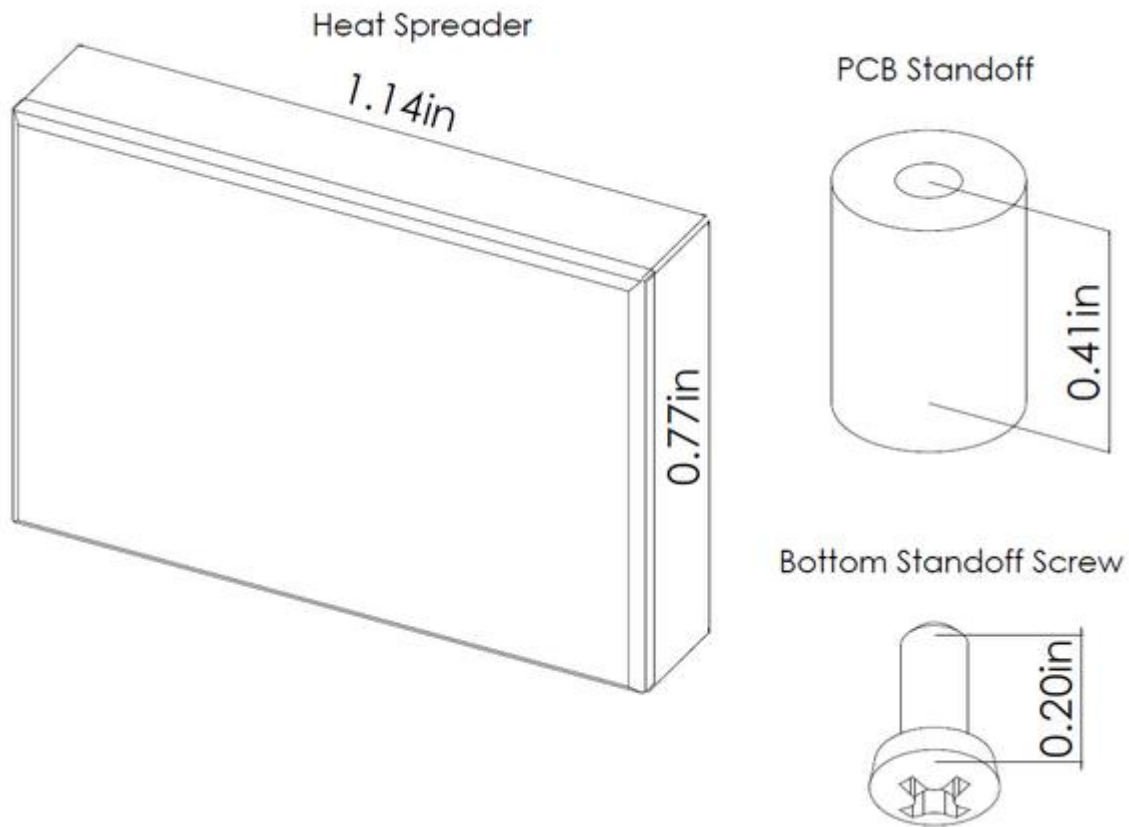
Heat Spreader, PCB Standoff Screw Draft and Dimensions
